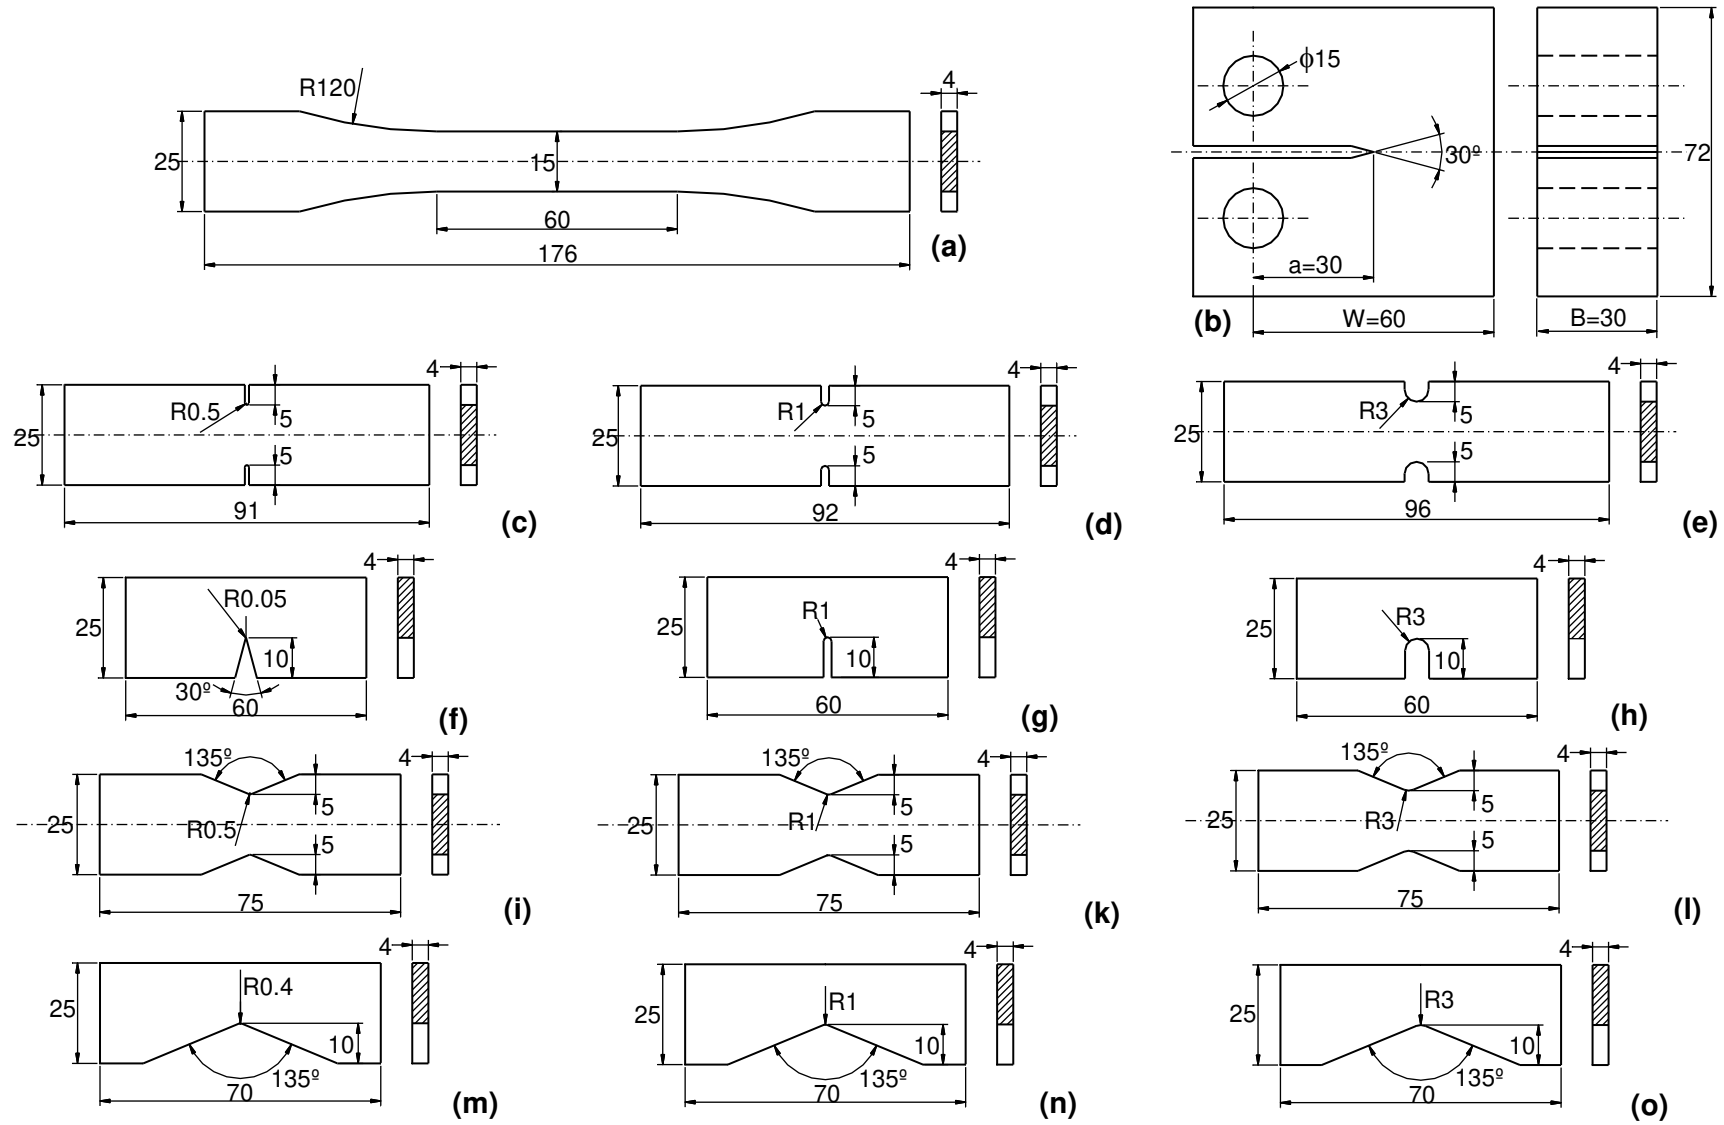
Geometries of the tested specimens (nominal dimensions in millimetres).
